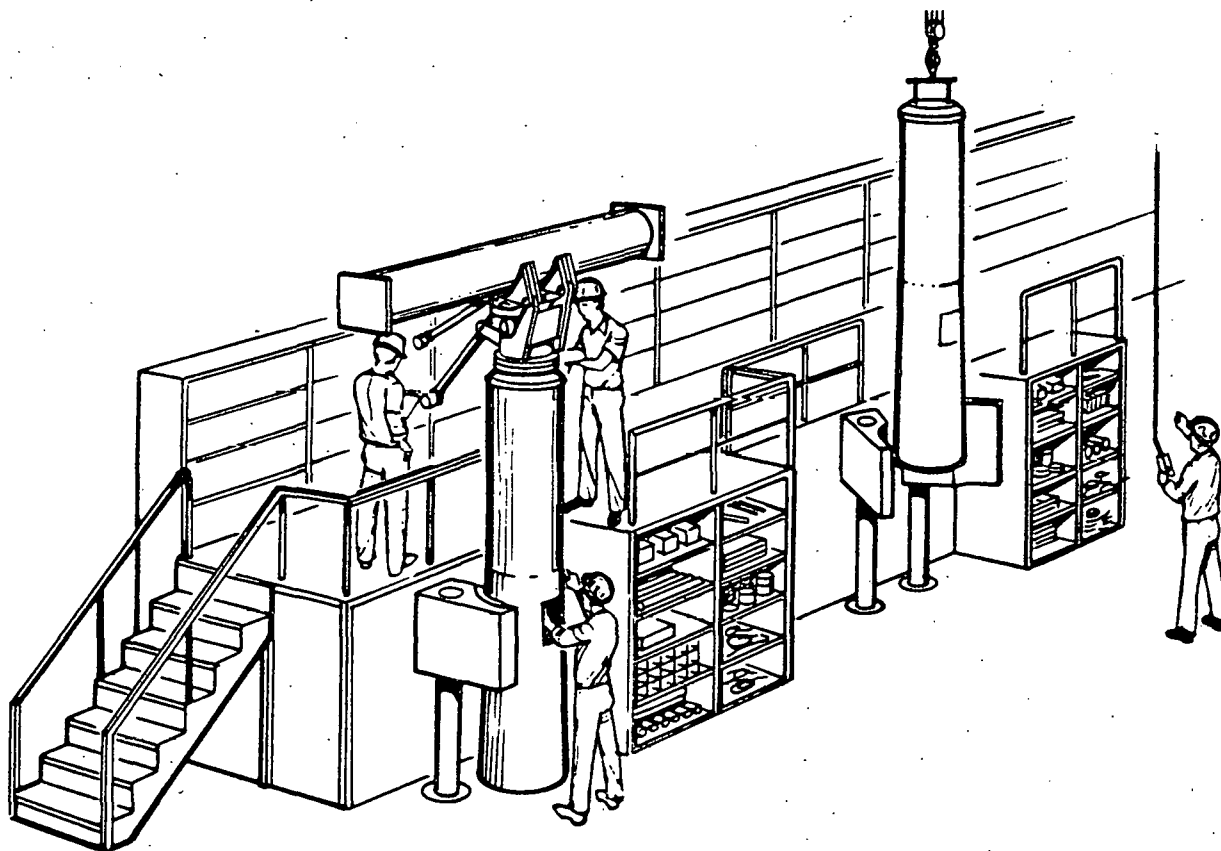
Final Assembly Joining Area Drive Unit to Pedestal
